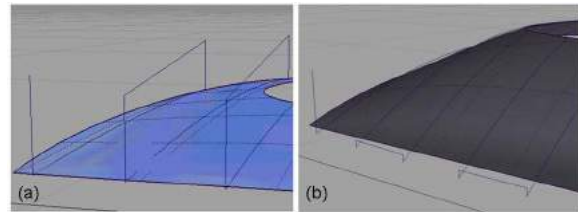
Tool path connecting types: (a) Box cut, (b) Lace cut.
